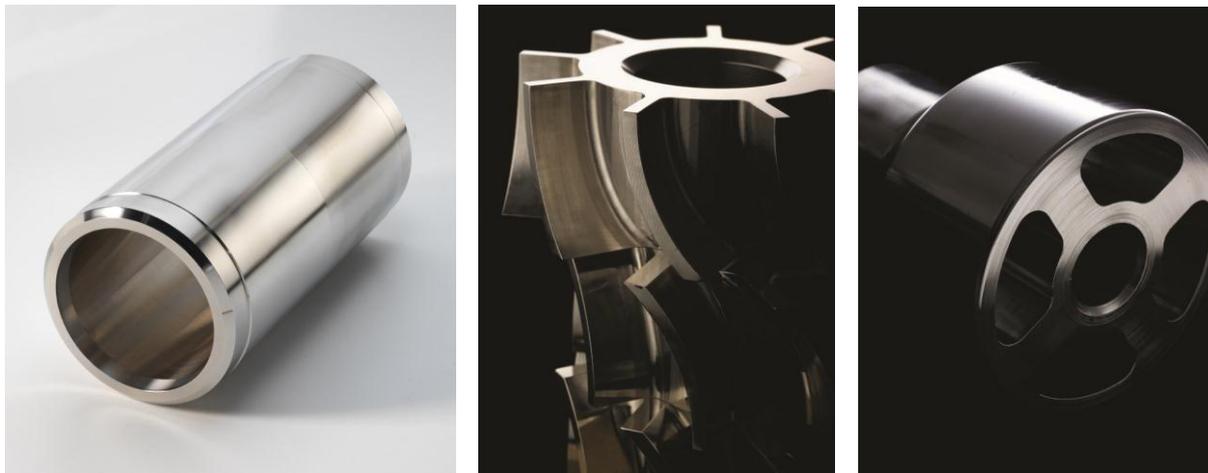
Examples of complex shape parts coated with Hardide: a pump cylinder coated inside (left), an impeller (center), and a flow diverter (right).
